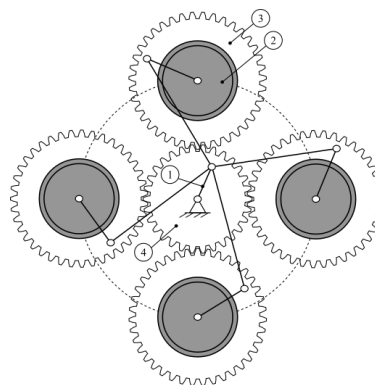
Schematic illustration of the freewheel gearbox with its components: crank rockers (1), freewheels (2), planet wheel (3) and central wheel (4) [14]
